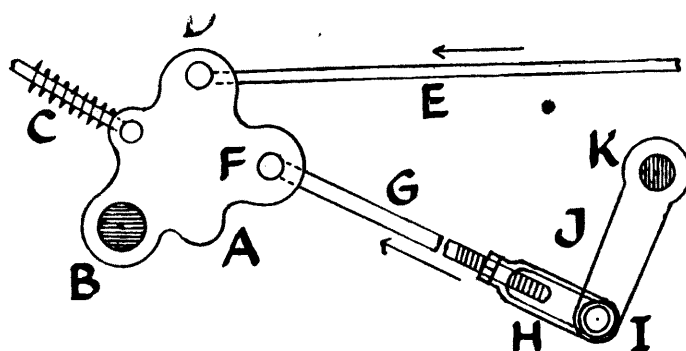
Shuttle Feeler and Weft Cutter Control.
